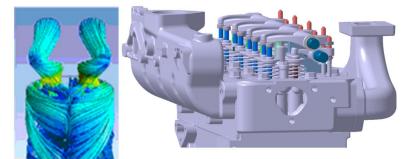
3D figures of 16 valve cylinder head and intake ports of tractor engine which uses õMR-Processö Combustion Mechanism.
